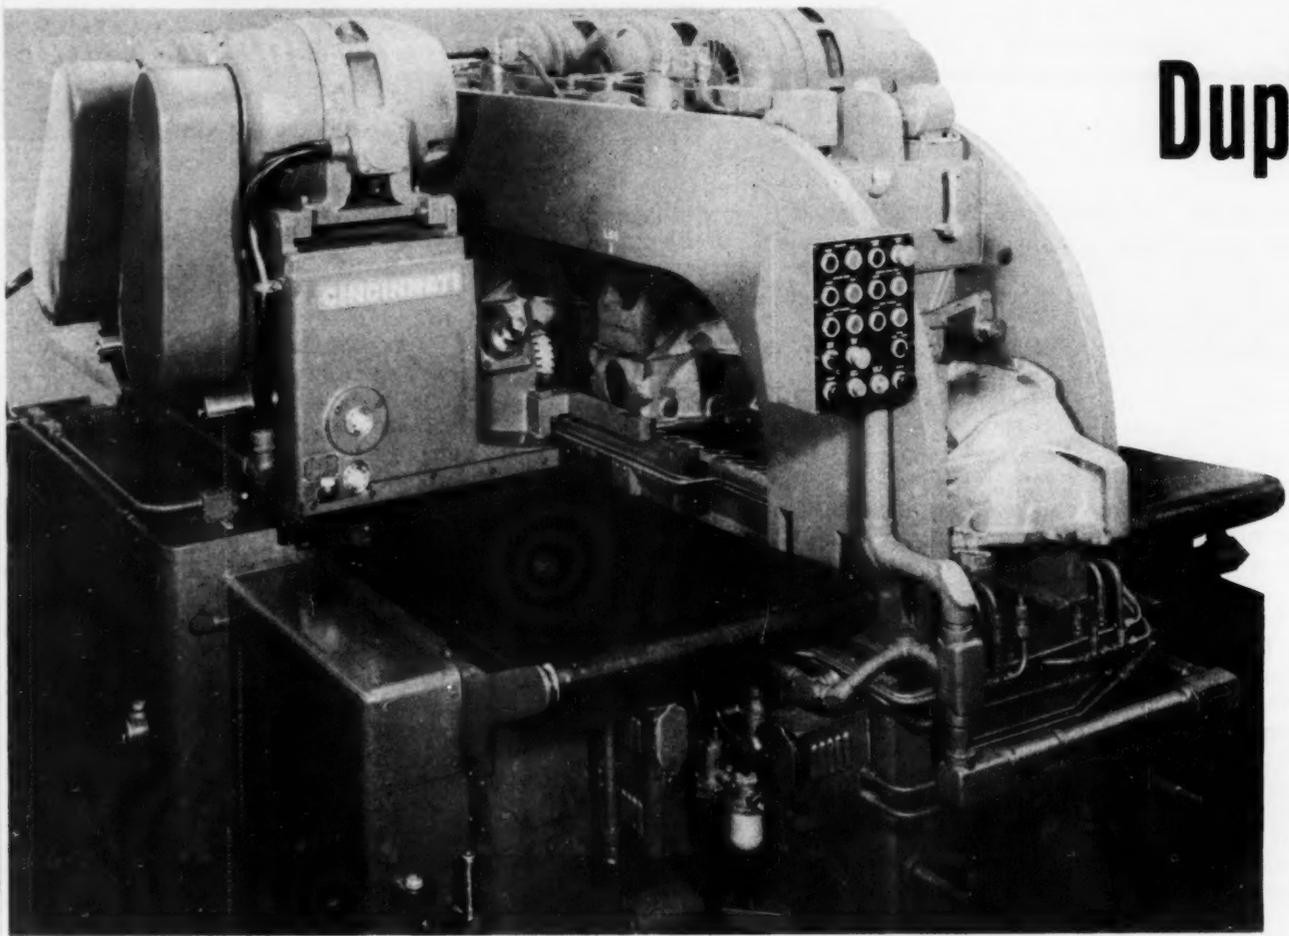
(above) — "Operator's view" of duplex transfer milling machine running off a batch of clutch housings in final test at builder's plant. Castings are delivered to and removed from transfer mechanism by conveyor system
